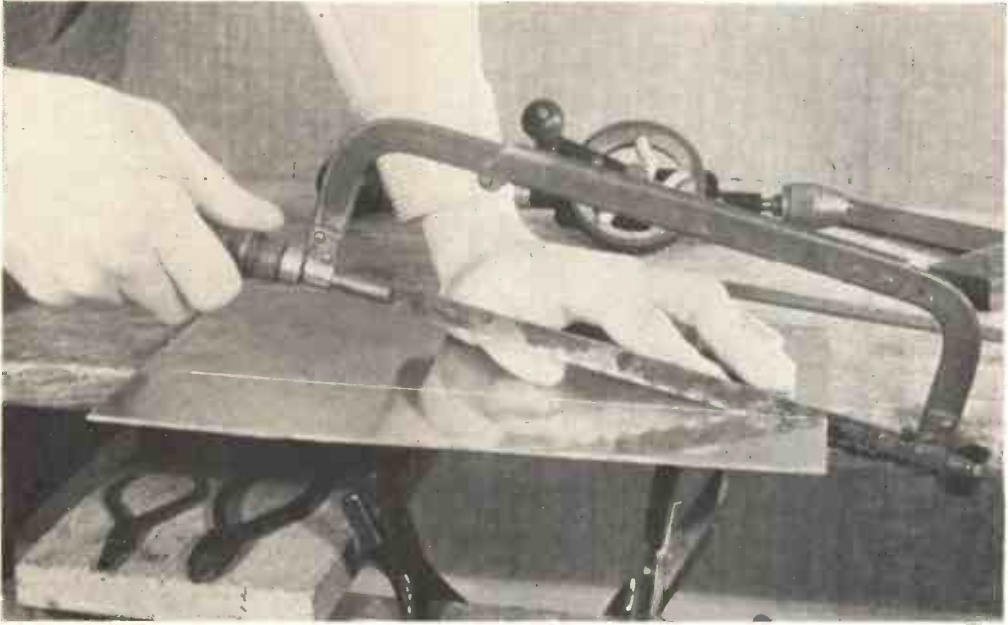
SHOWING HOW THE SHEET IS CUT WITH A HACK-SAW.
